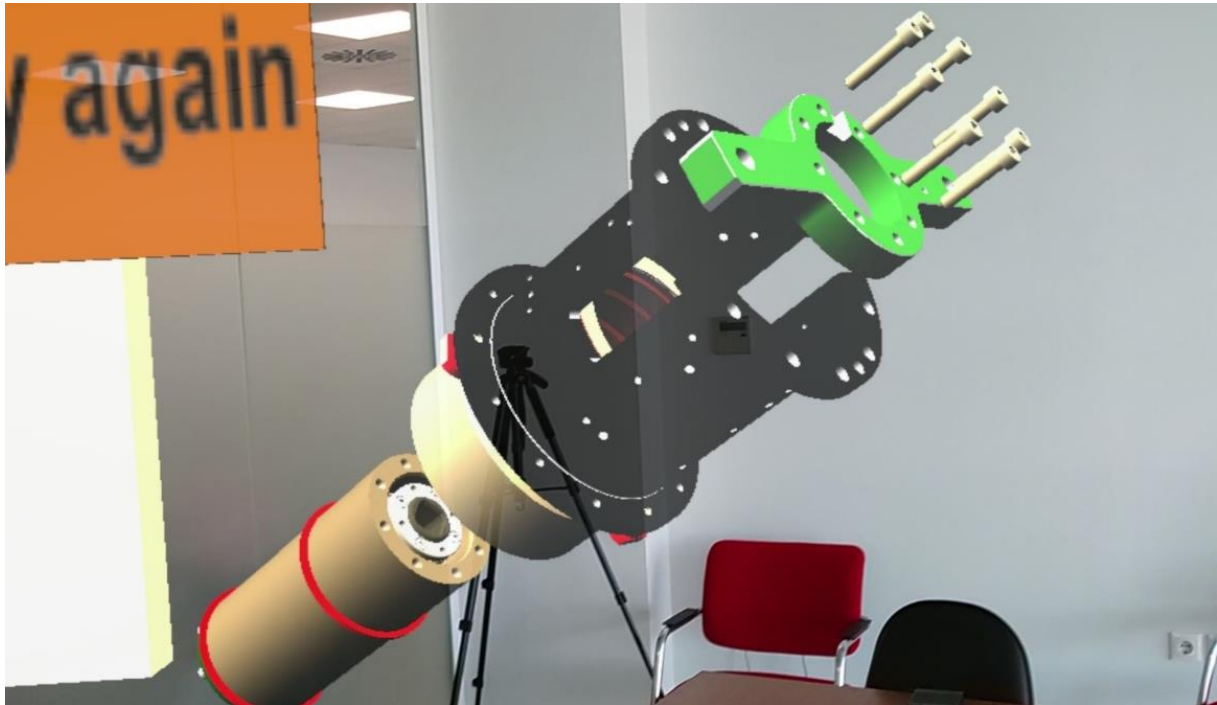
Snapshot of 3D model render for disassembly during quill unit exchange in the demo on AR glasses for the friction welding machine RSM401 of HWH
